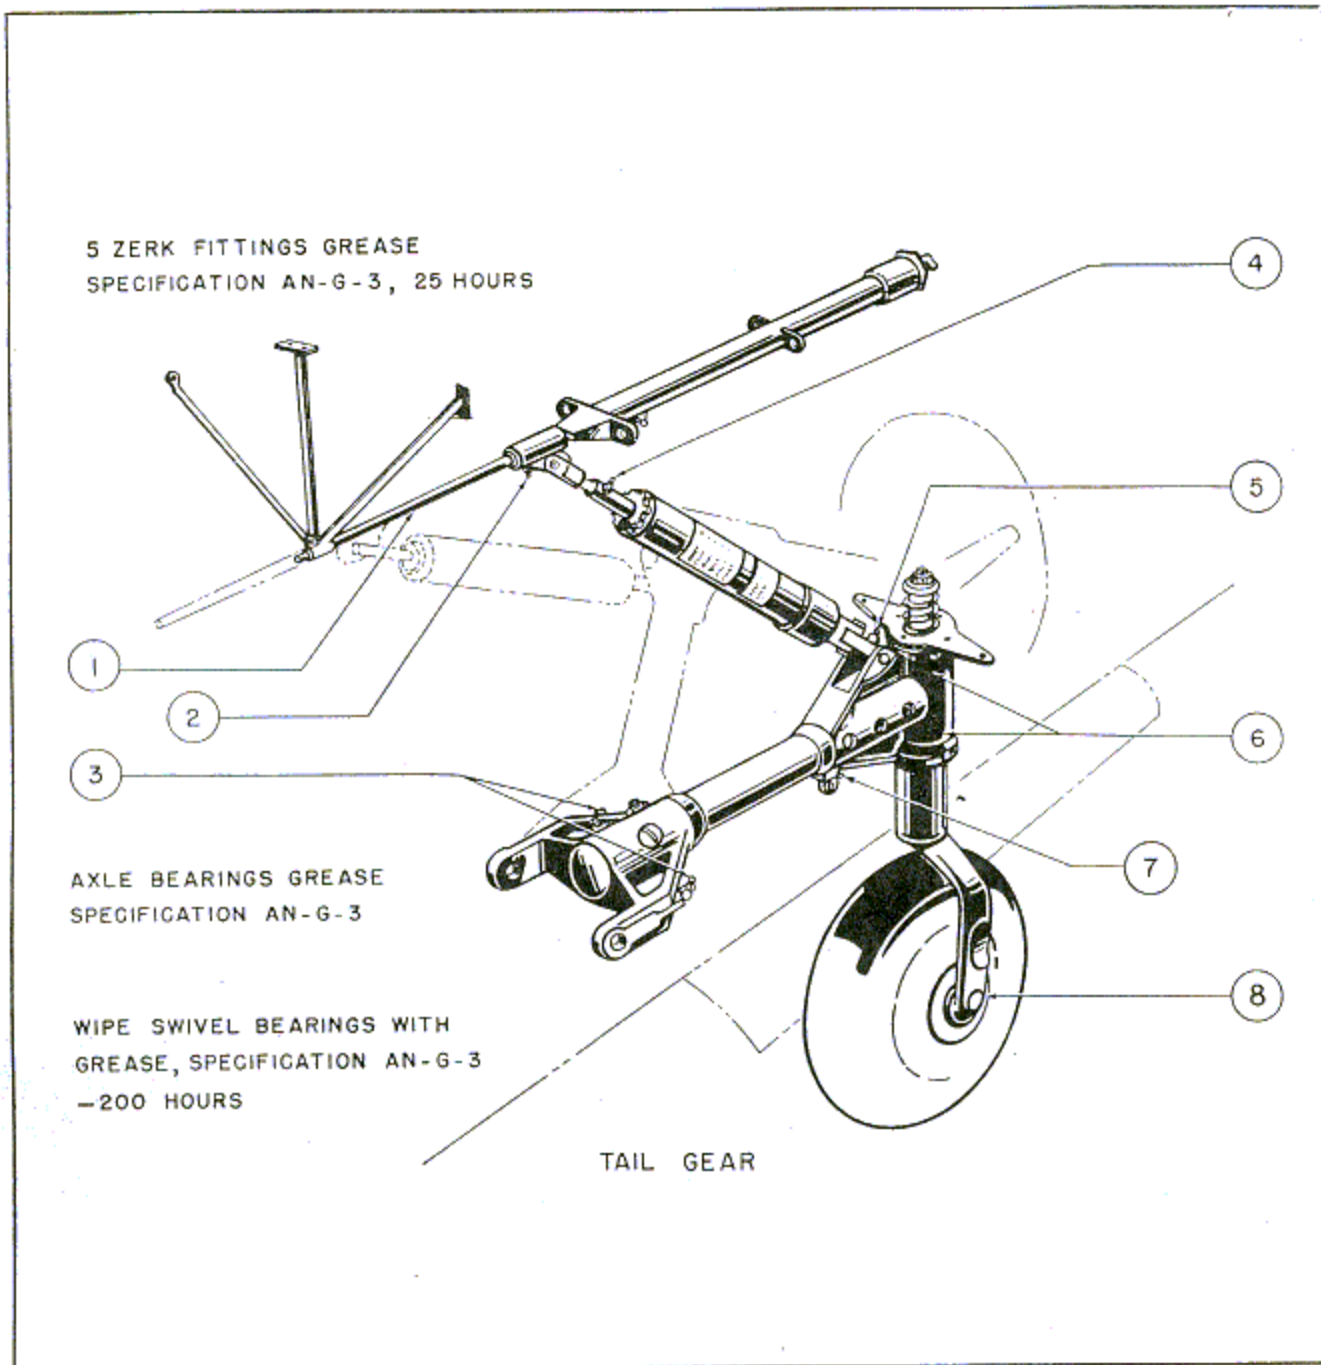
(Sheet 3 of 3 Sheets)—Lubrication Diagram
